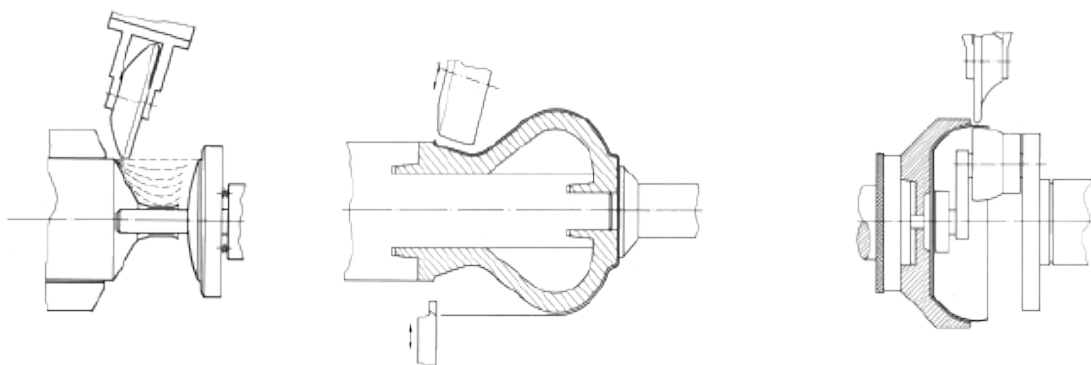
Illustrate spinning-on-air and techniques of using internally segmented and eccentrically mounted tooling.
